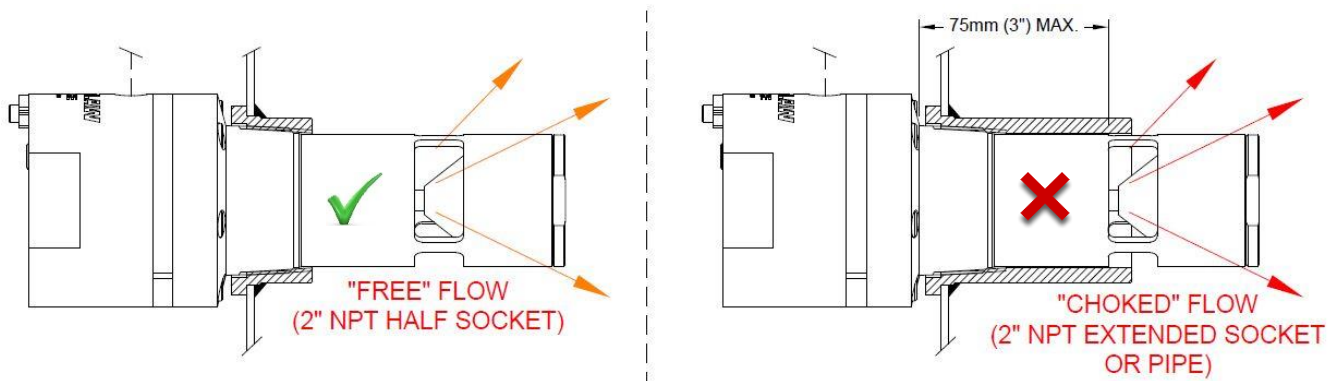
Do NOT Install Valve Back End within Pipe (or Extended Socket)
